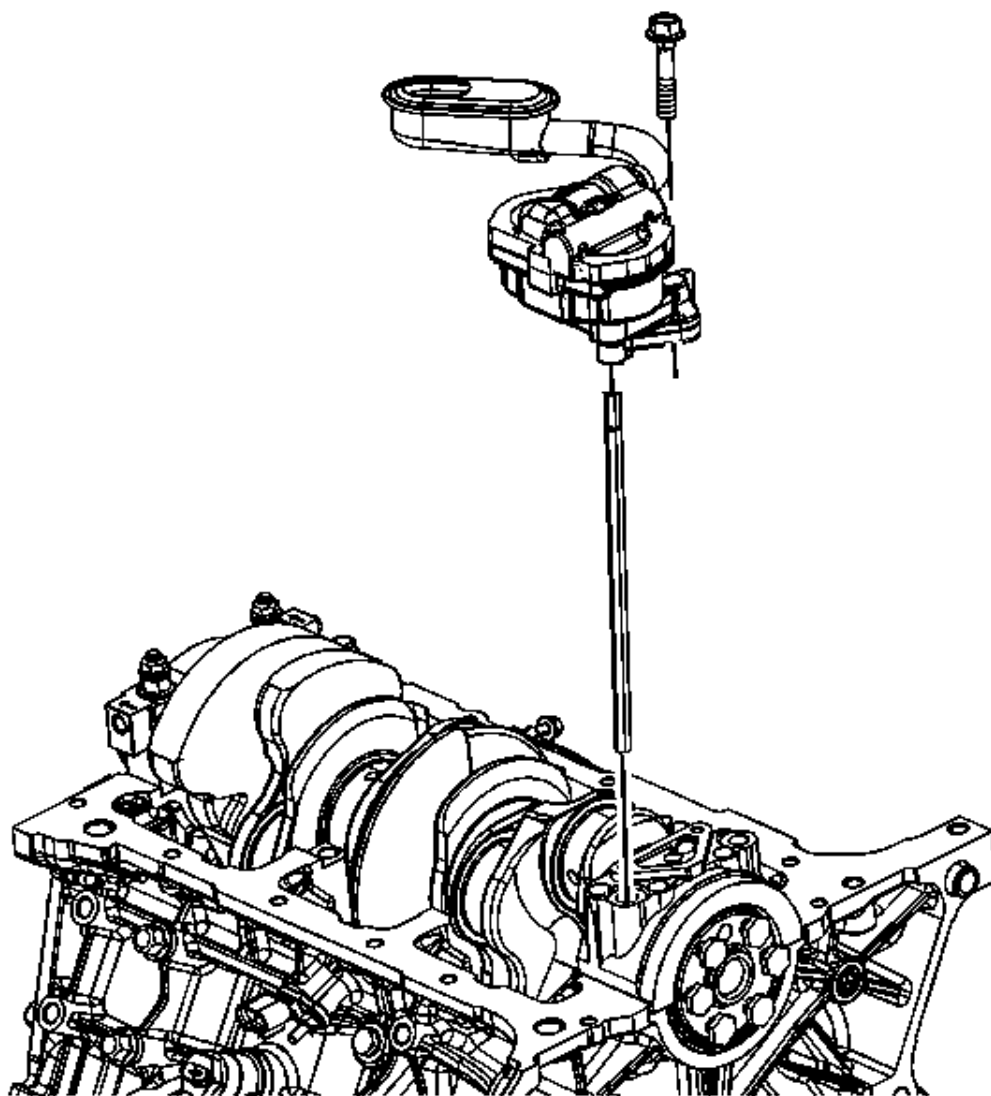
Identifying Oil Pump, Screen & Driveshaft
